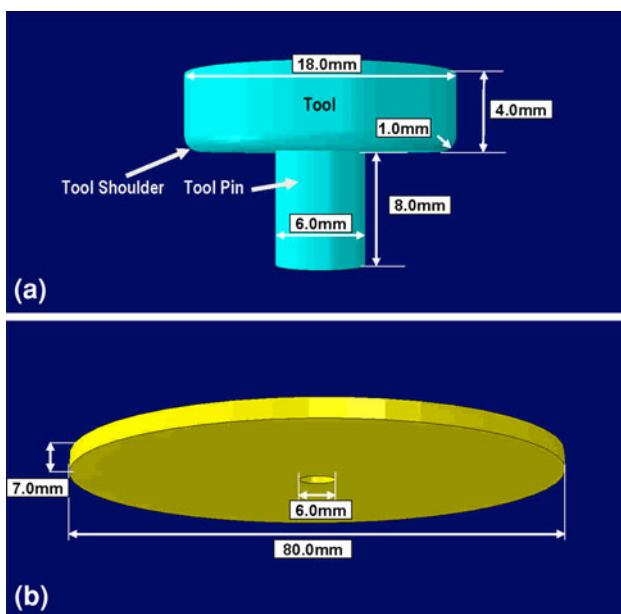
Geometrical models with dimensions for the (a) FSW tool and (b) FSW work-piece
